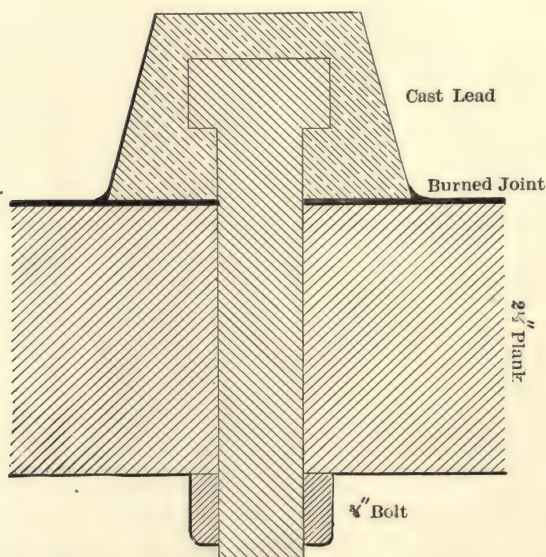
Detail of lead lined tank construction showing method of bolting lead lining to wood frame with iron bolts protected with lead.
